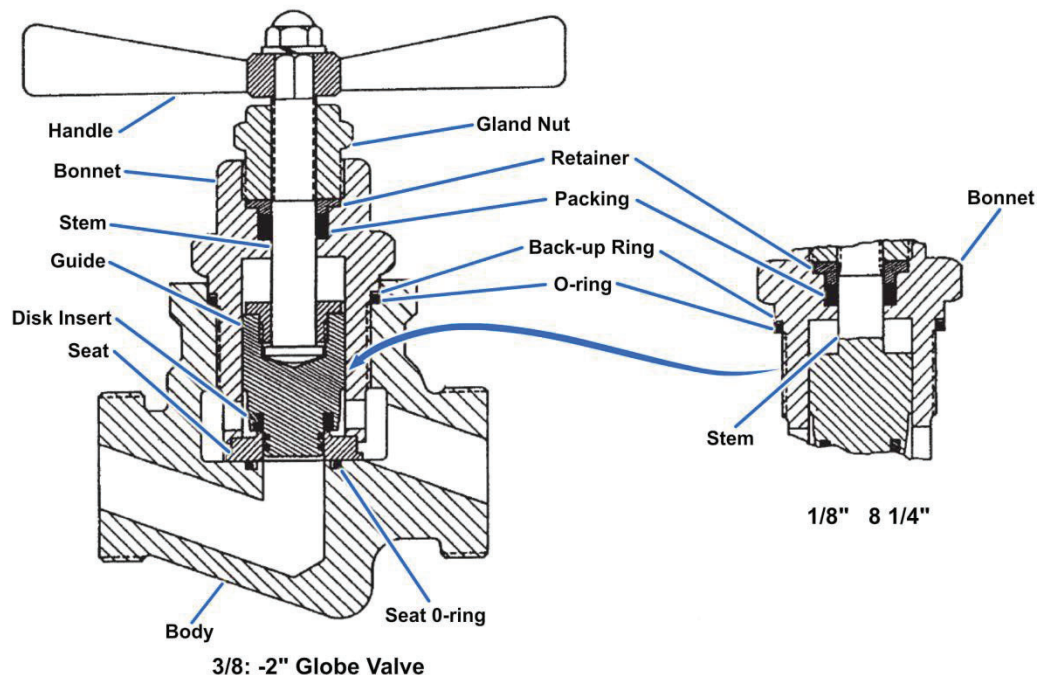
Hydraulic and pneumatic globe valve (rising stem).
